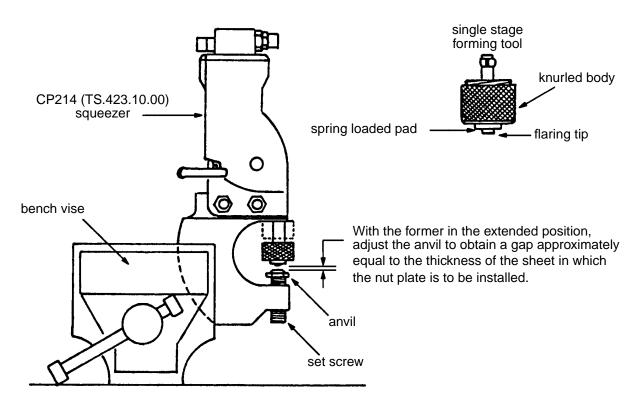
CP214 (TS.423.10.00) Squeezer - Single Stage Forming Die
